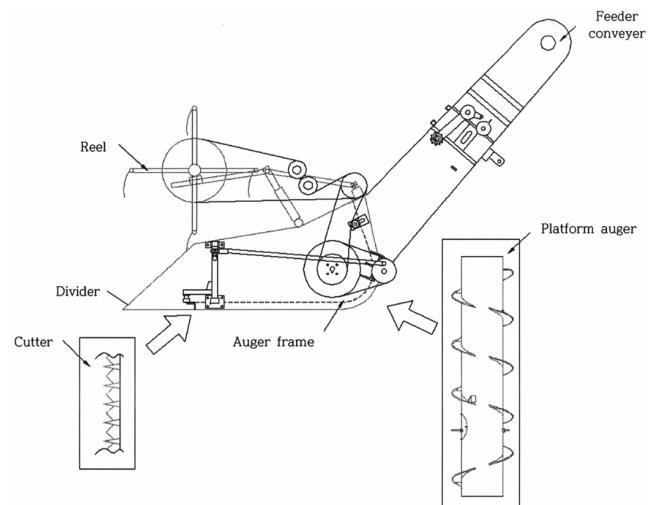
Arrangement of the divider, reel, cutter, platform auger, and feeder conveyer.
